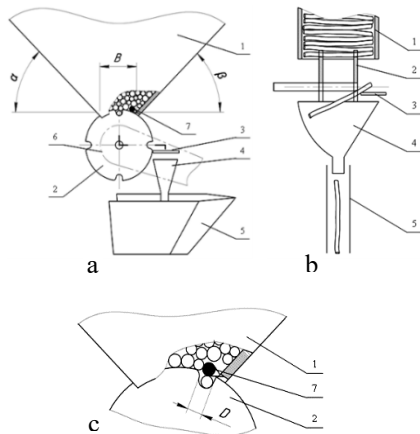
Construction scheme of the machine for feeding cuttings into the coulters: a - side view of the automatic planter (with partial cuts); b - cross-section of the mechanism in the machine; c - scheme of operation of the cuttings separator; 1 - slotted hopper, 2. drum with cells, 3. stop, 4. guide funnel, 5 - coulters, 6 - flexible transmission (chain), 7 - cleaner.
